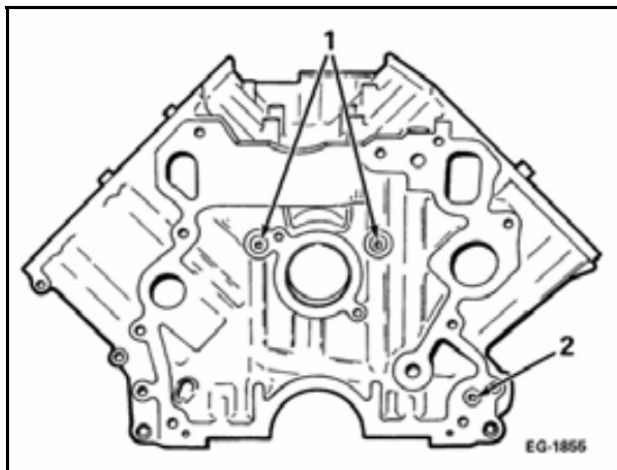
Valve Lifter and Main Oil Gallery Plug Locations
